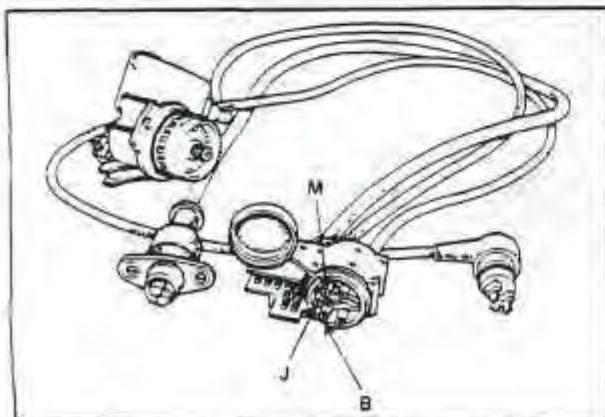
GOVERNOR COMPUTER ASSEMBLY
